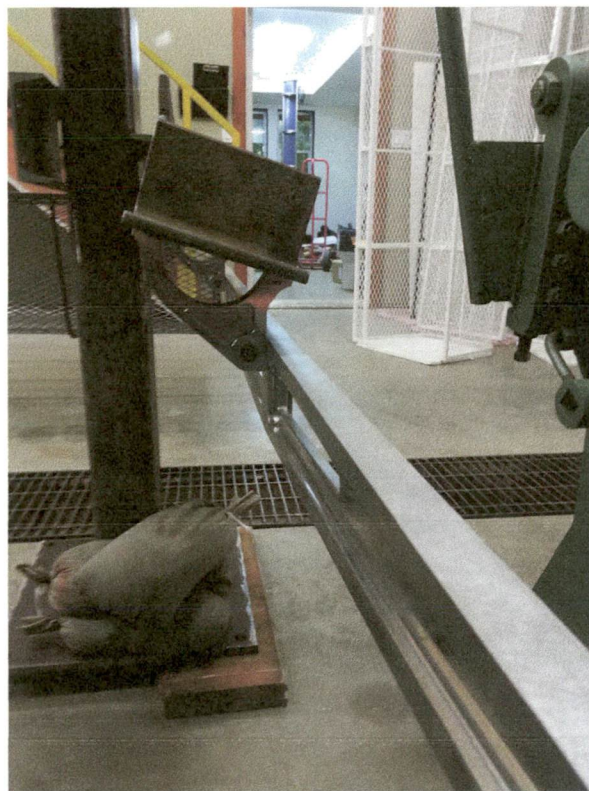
Test Fixture – Looking aft at aft fixture
